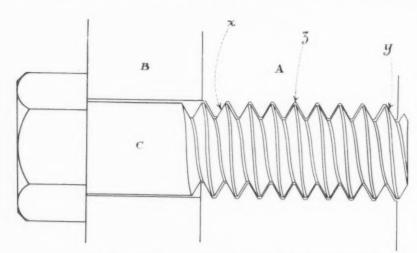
LEAD OF SCREW GREATER THAN THAT OF THREADED HOLE
